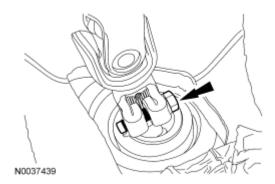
Locating Steering Intermediate Shaft Bolt Courtesy of FORD MOTOR CO.
